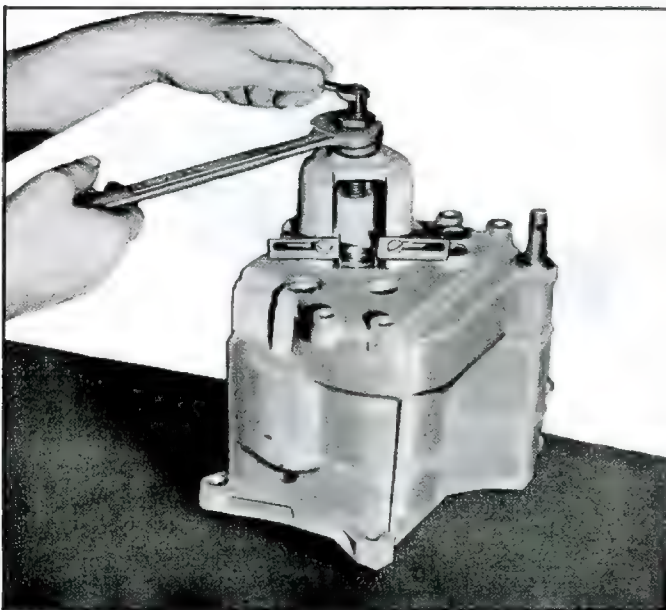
A-7—Pulling Clutch Gear and Bearing with J-8361
